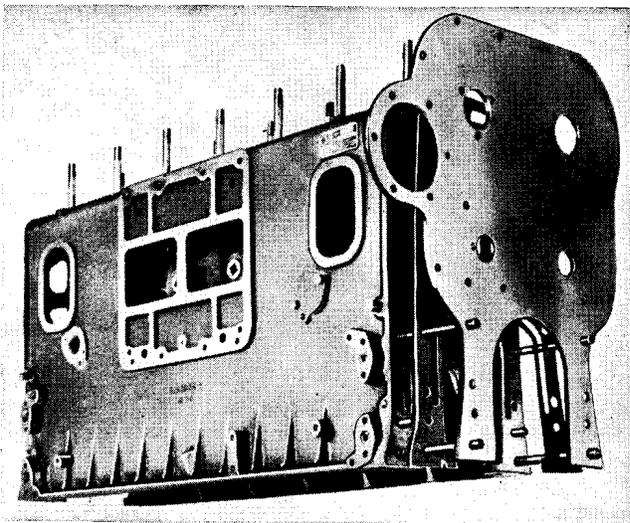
GM 6-71 Cylinder Block. Rear end plate in front.
